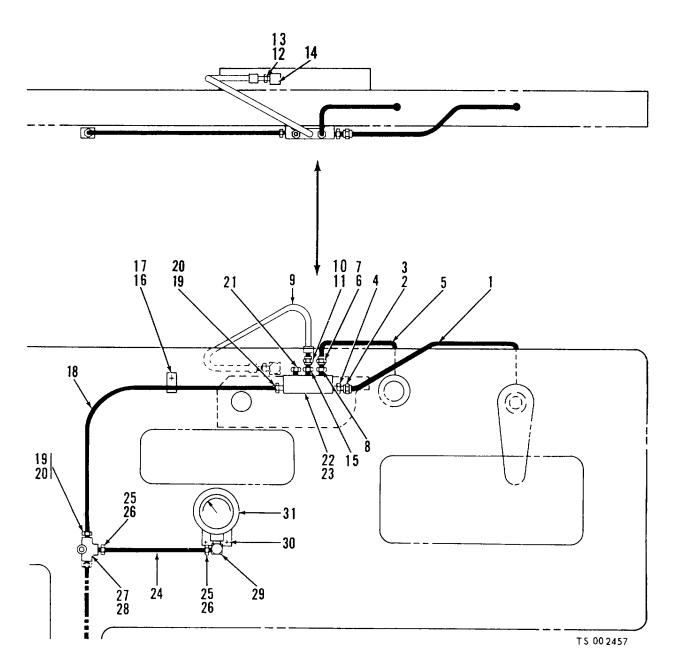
Delivery unit oil line assembly. (Sheet 1 of 2)
